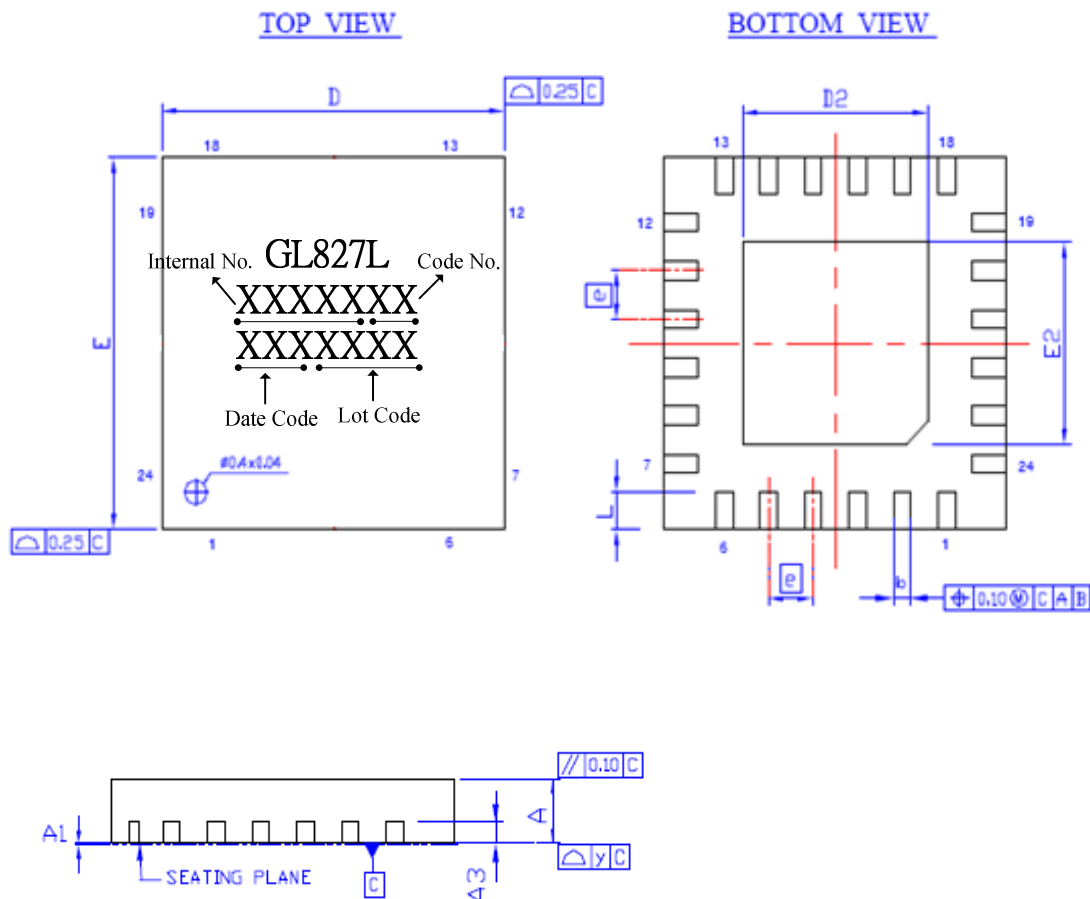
GL827L 24 Pin QFN Package (For 827L-03 and later version)
